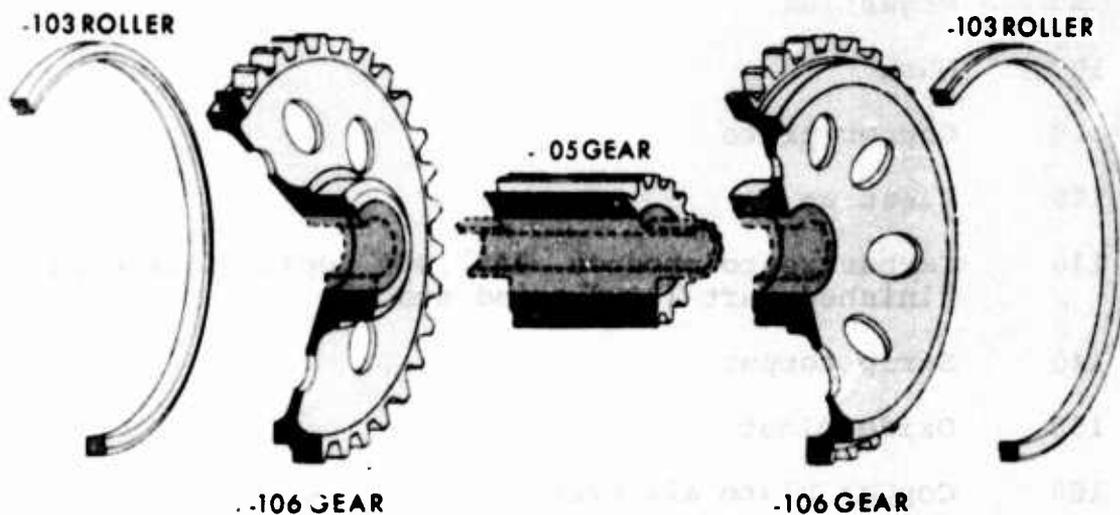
Exploded View, First-Row Pinion RG351-11182.
